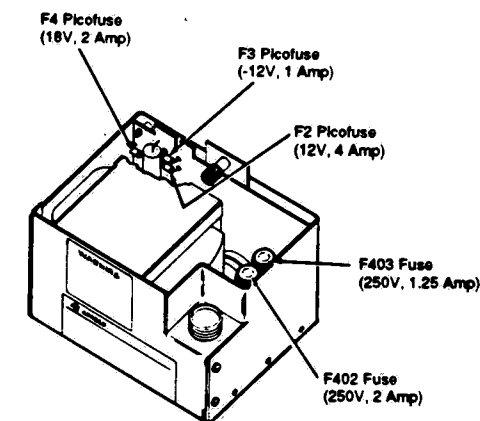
POWER SUPPLY FUSE LOCATIONS.
